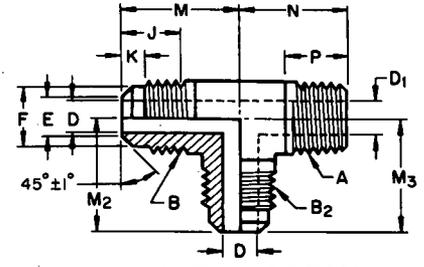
RIGHT ANGLE TWO WAY REDUCING TEE
